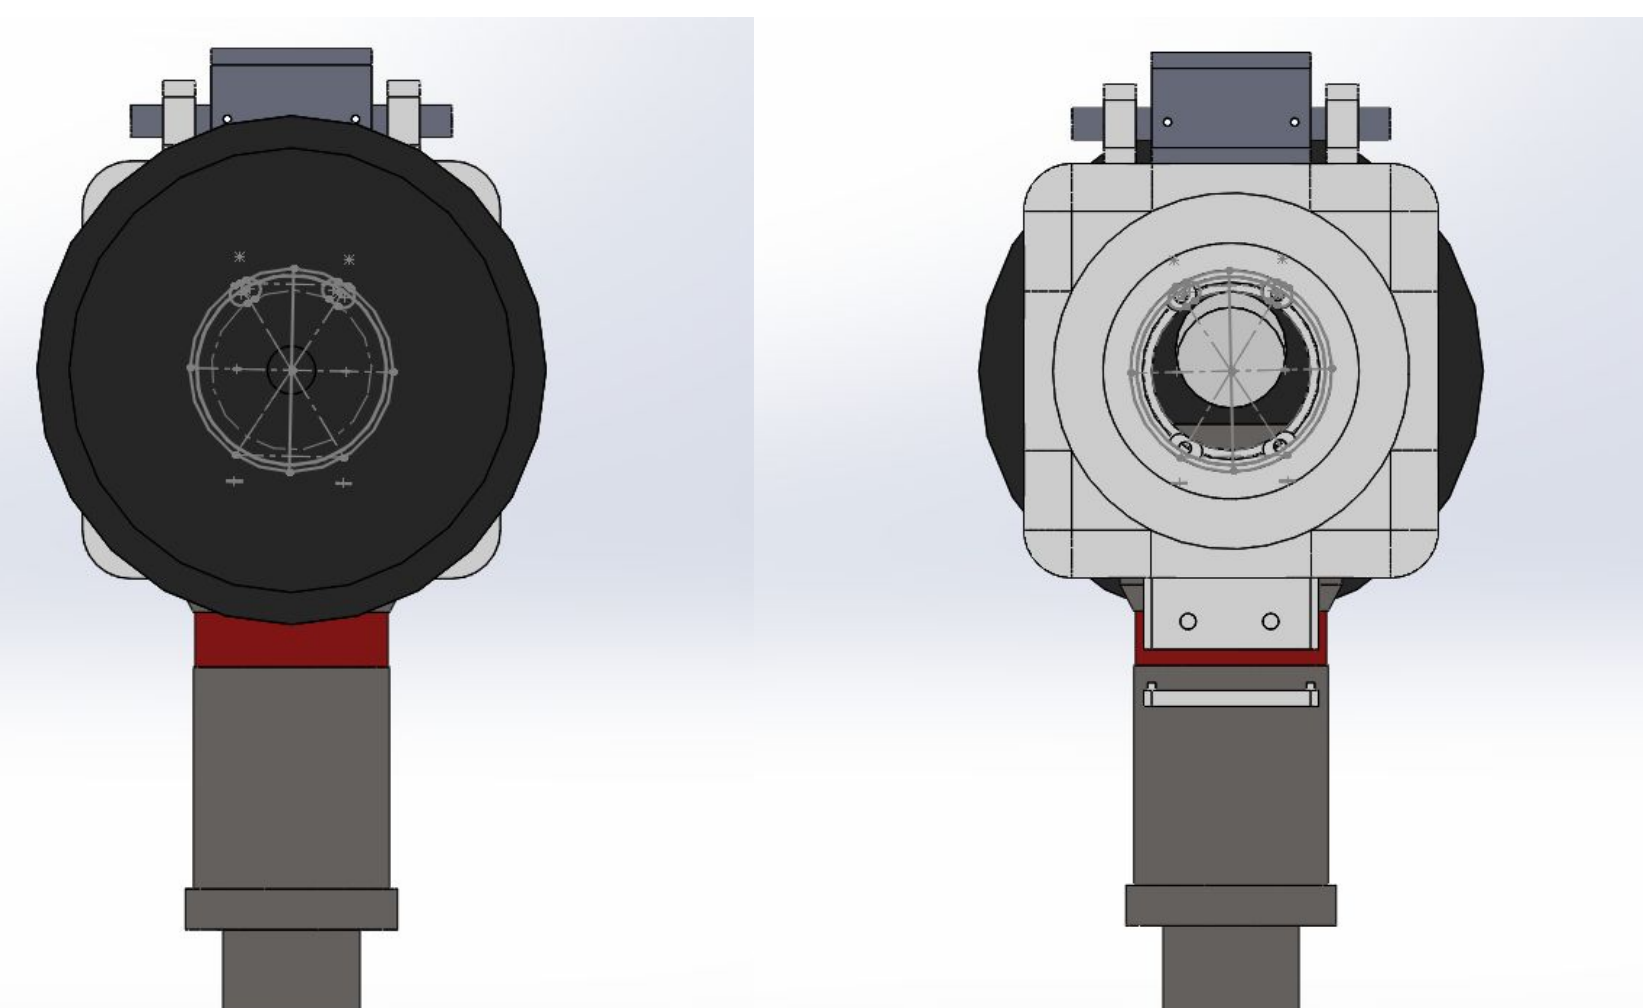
End views of CAD model of Len(s)wipe, showing trigger on top and spring box on bottom.
